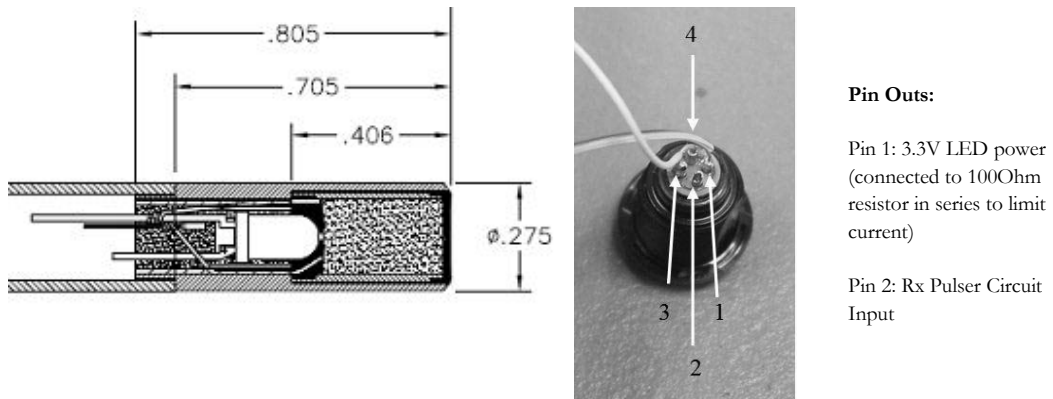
DGH Probe Dimensions and Pin-outs [7]
